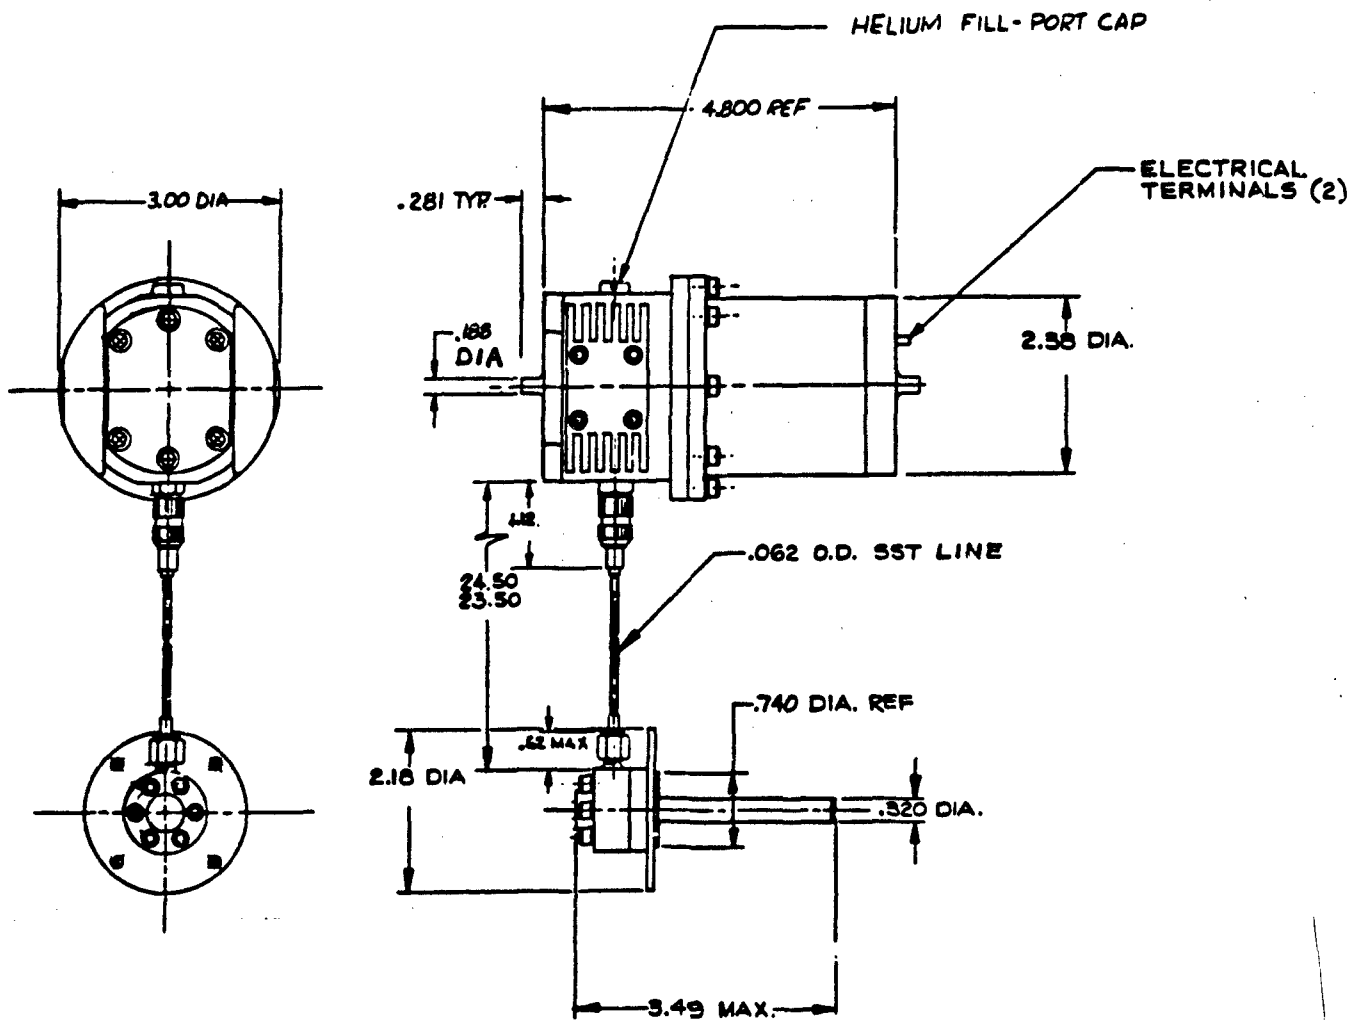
1.0 WATT COOLER ASSEMBLY - ENVELOPE DIMENSIONS
